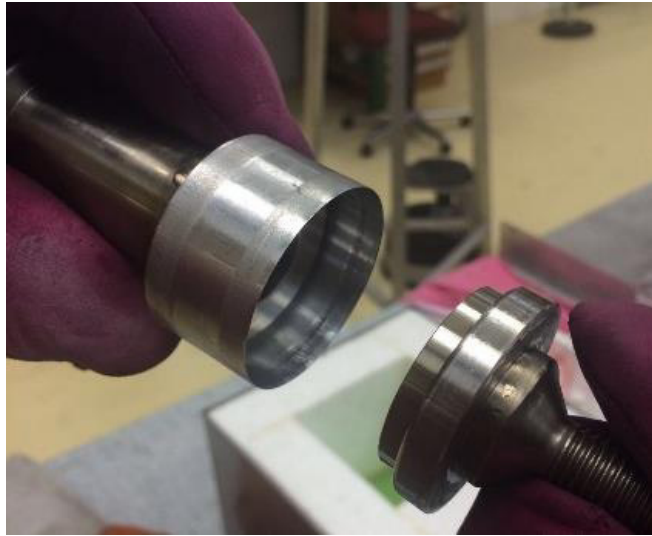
Photography of proof-of-concept pipe-gasket coupling assembly for SMA-based connectors comprising a steel chamber (AISI 316LN) and an aluminum gasket (EN AW-6082-O).
